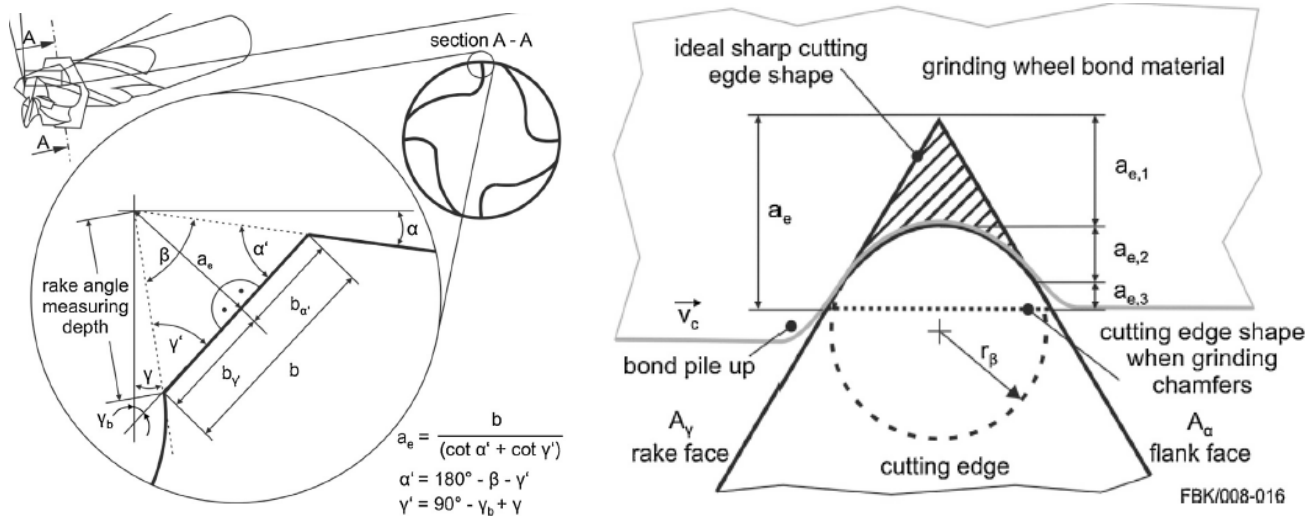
Elastic-Bonded Superabrasive Grinding [26].
